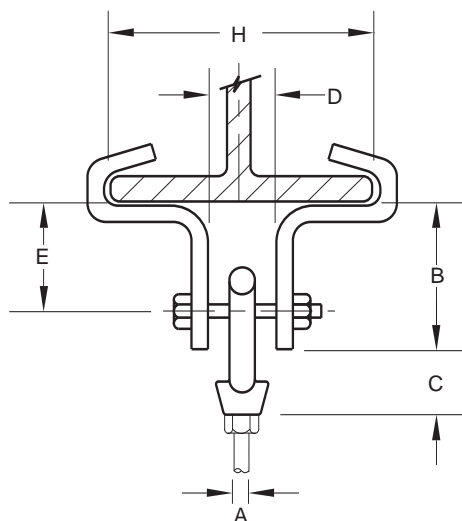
BEAM CLAMP WITH SWING NUT
